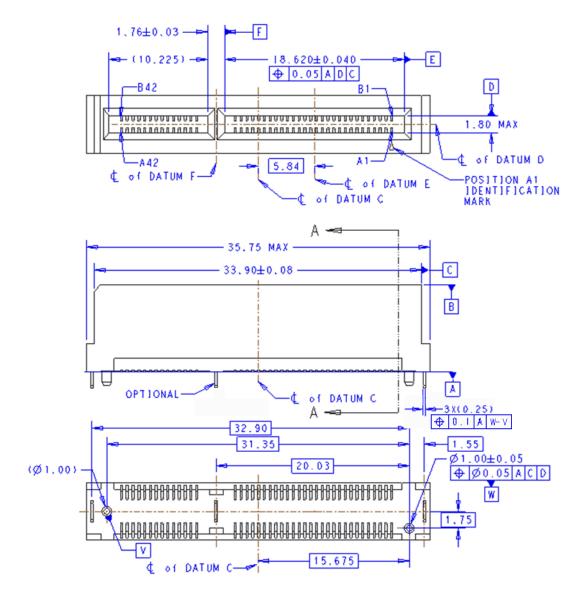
2C STRAIGHT CONNECTOR DIMENSIONS
